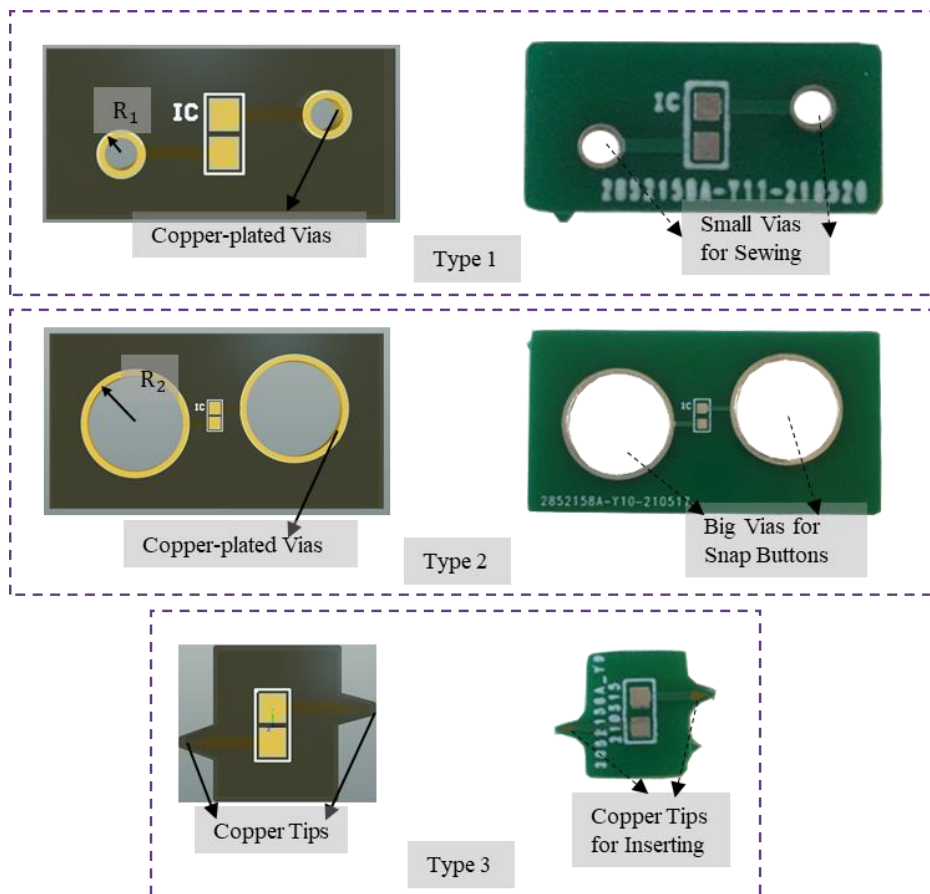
PCB boards of the three proposed electro-textile interfaces
